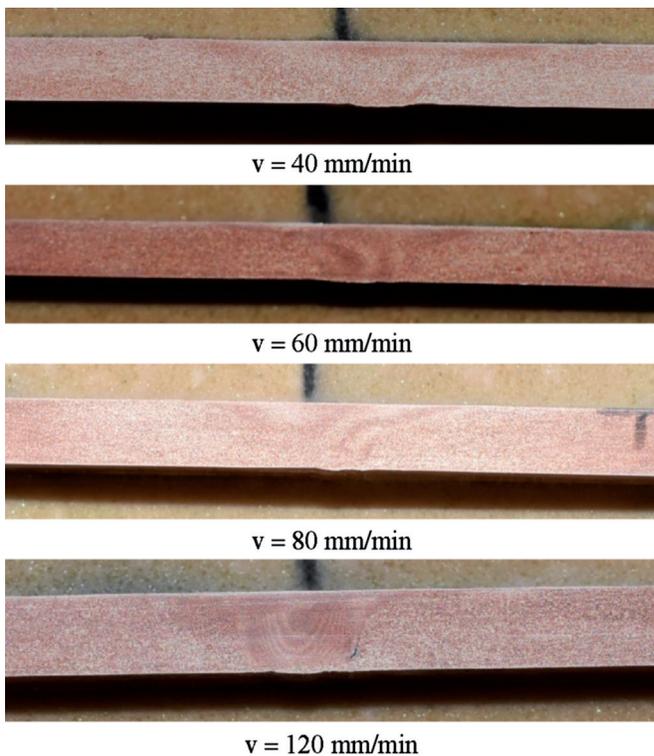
Macroscopic appearance of FSW-IG welds - Cu99.
